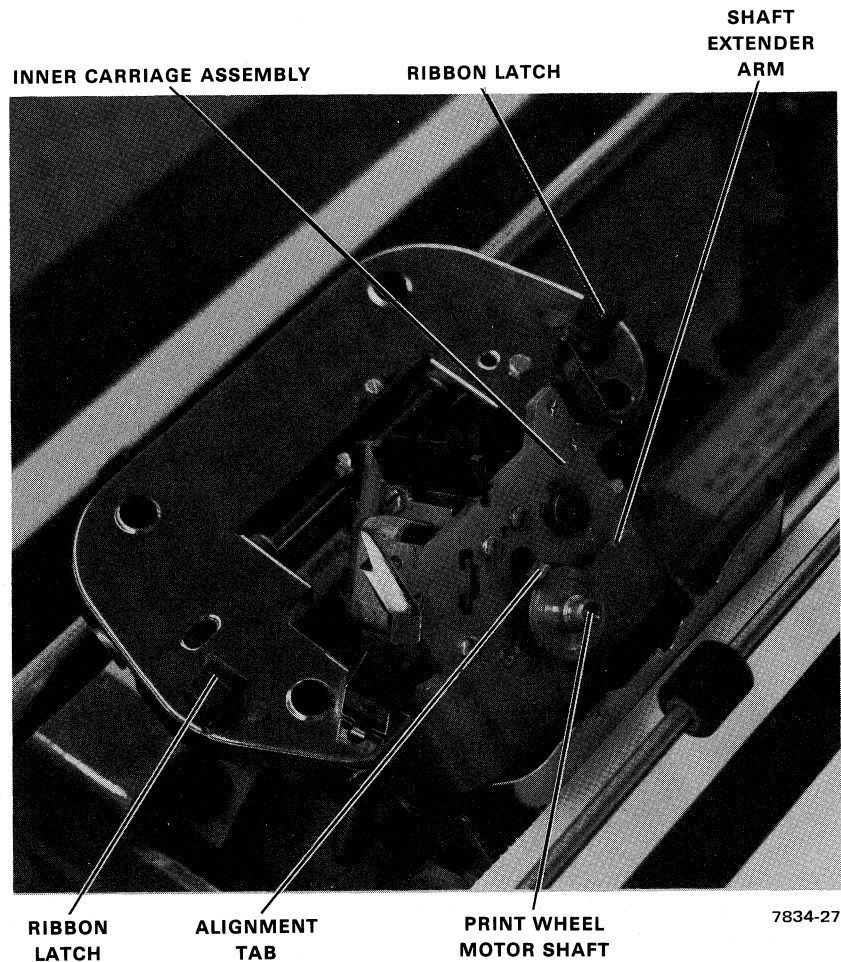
Inner Carriage Assembly Titled Away from Platen
